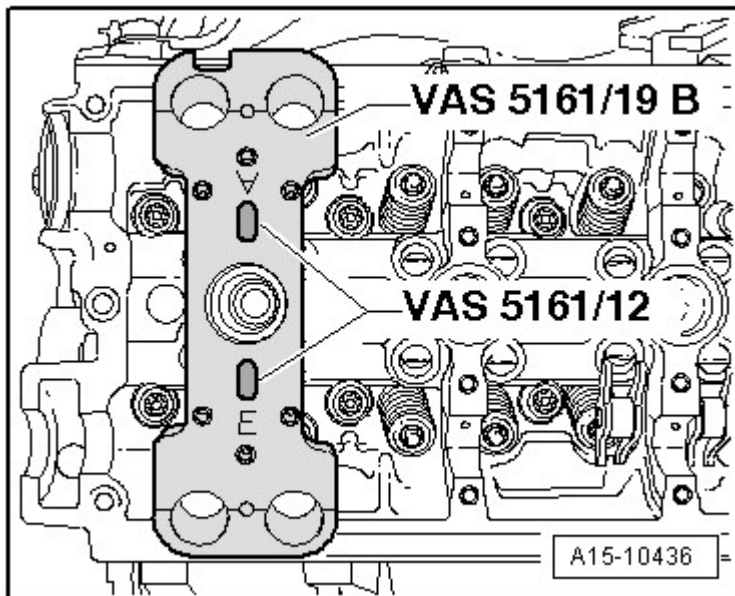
FSI Engine VAS 5161/19B Guide Plate Tightened On Cylinder Head Using Knurled Bolts VAS 5161/12
